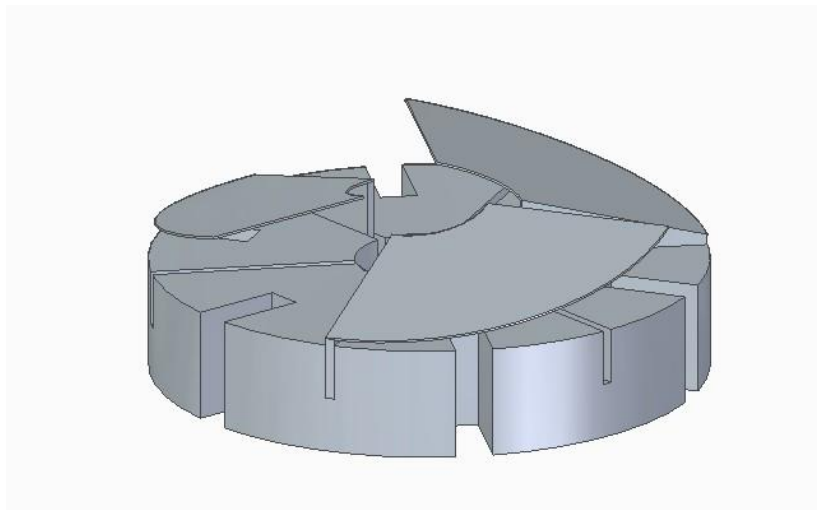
3D CAD Model and Assembly of Foils to Bearing Block
